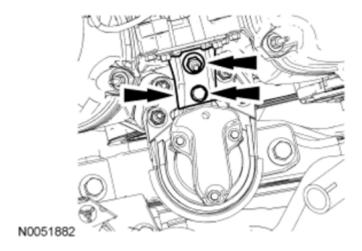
Locating Engine Mount Brace Nut And Bolt Courtesy of FORD MOTOR CO.
